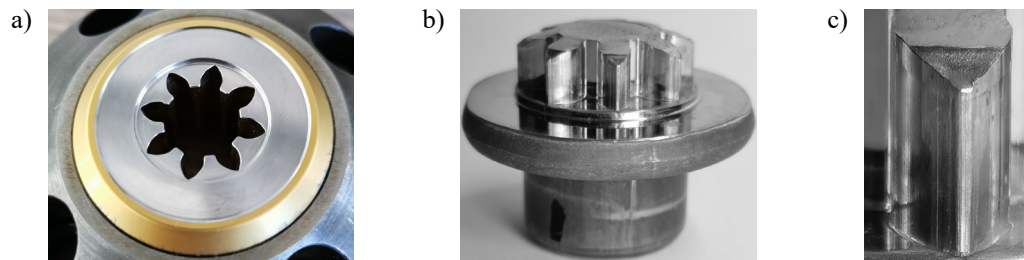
a) Trimming die with annular indentation of 1.0 mm, b) pressed part without cracks and c) detail of tooth tip.
